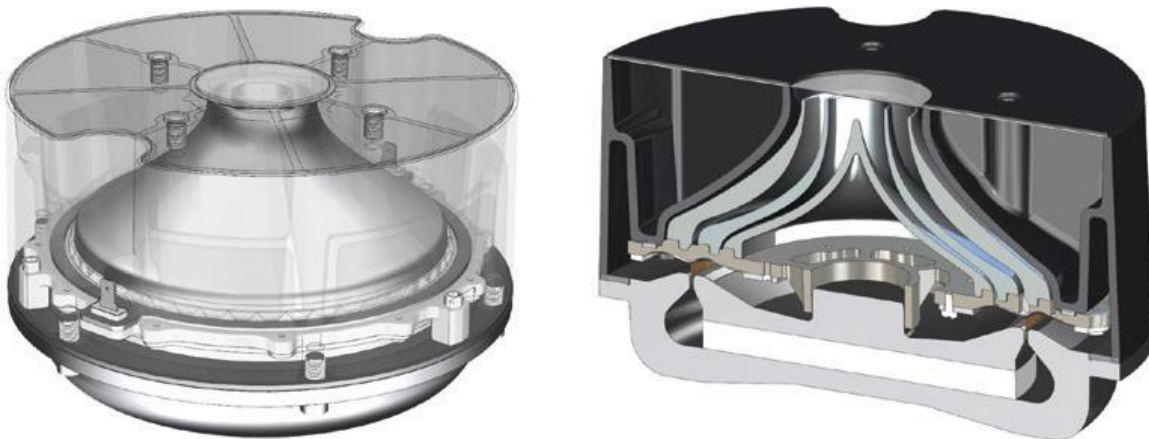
Celestion Axi2050 phantom/cut-away views showing extensive 3-piece phase plug design
